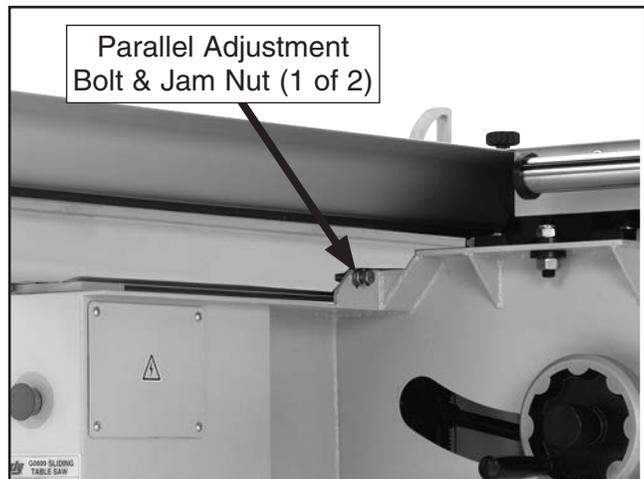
Sliding table parallel adjustment bolt (1 of 2).
